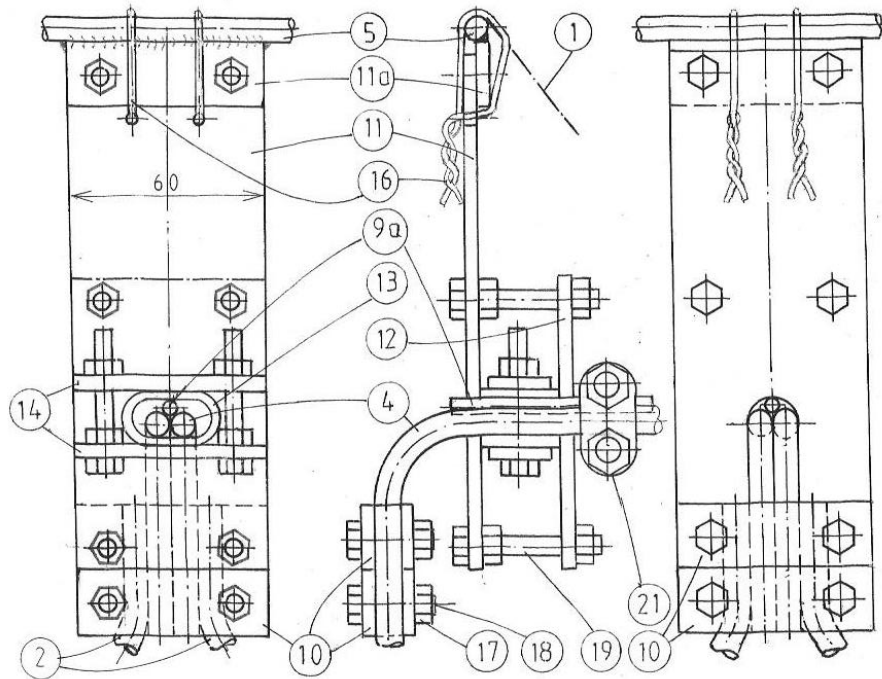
Friction Clutch with Bearing Plate (11), Pressure Plate (12), Friction Ring (13), Friction Ring Holder (14), and Rope Clamp (21); For details of the connection of Axis (4) with the Vertical Stands (2) see Fig. 8a.
